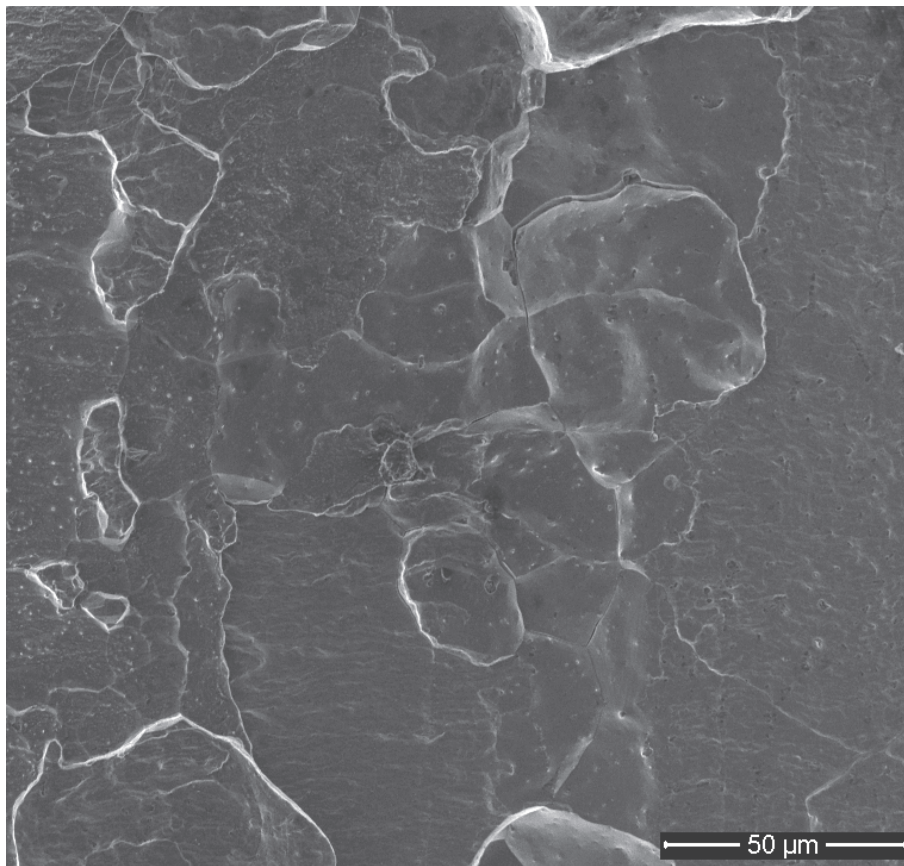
SEM image of the fracture surface of sample B. Different fracture morphology are observed. The fracture surface is similar to the ones found in the IHE chapter.
